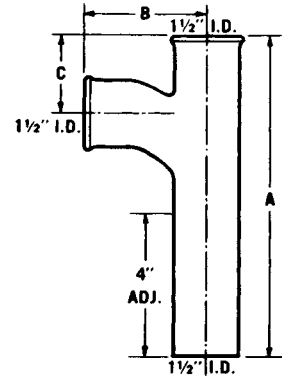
Adjustable Sanitary T (Plain End Outlet)
